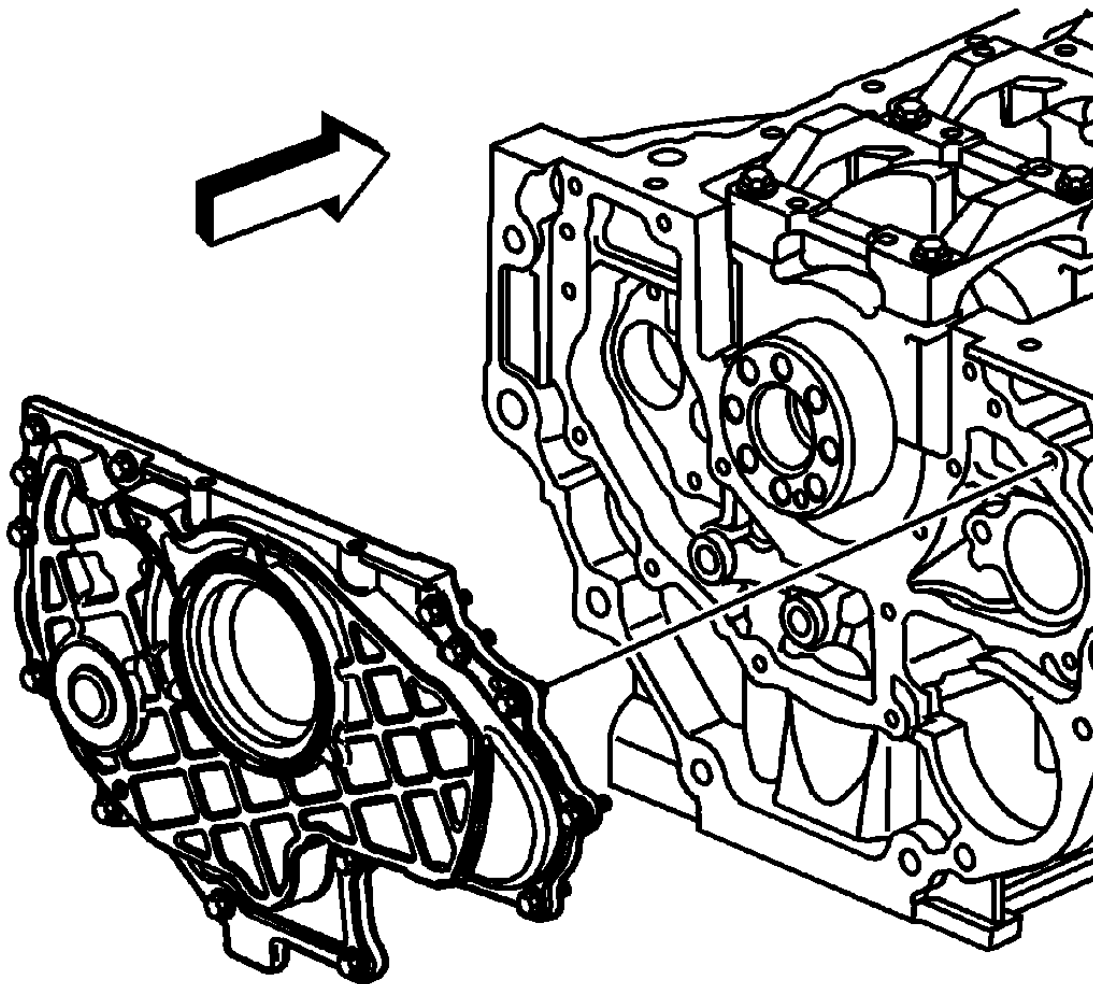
View Of Crankshaft Rear Oil Seal Housing
